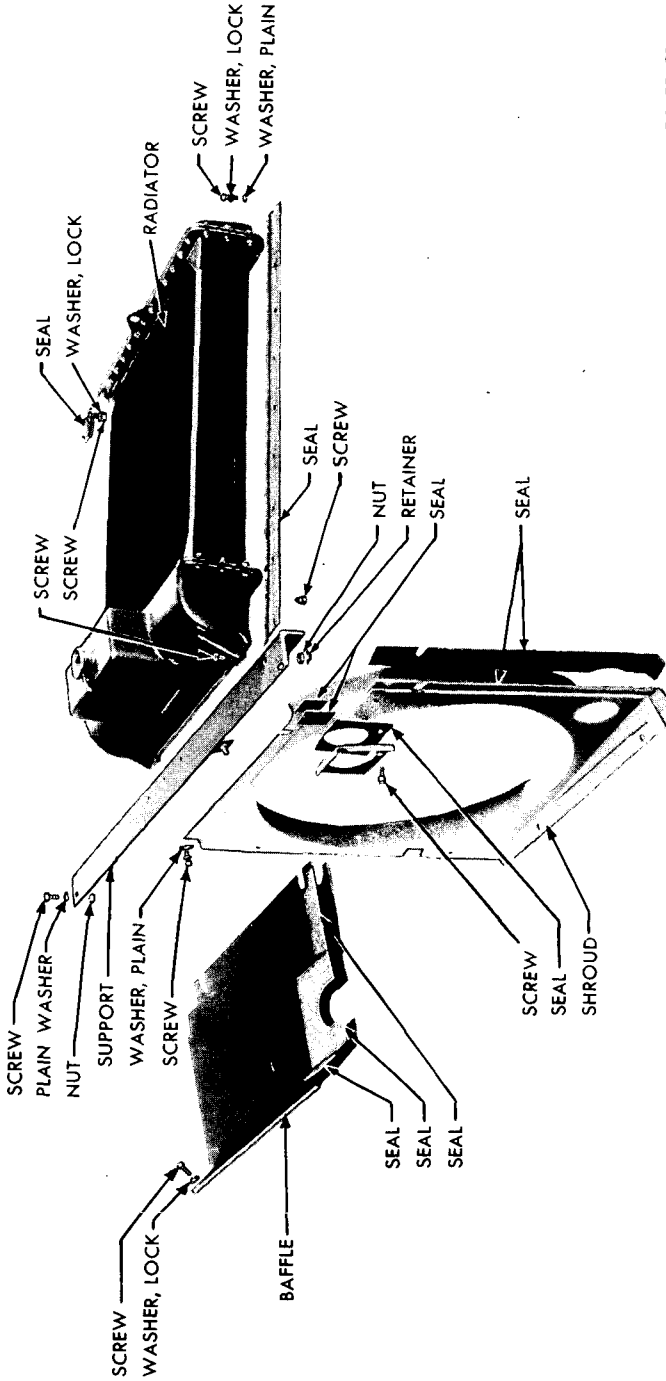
Radiator Seals and Fan Shroud — Exploded View
